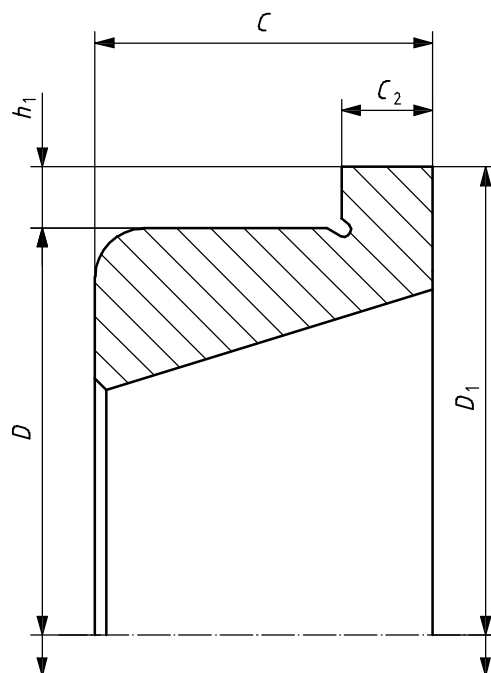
Single-row tapered roller bearing with flanged outer ring
